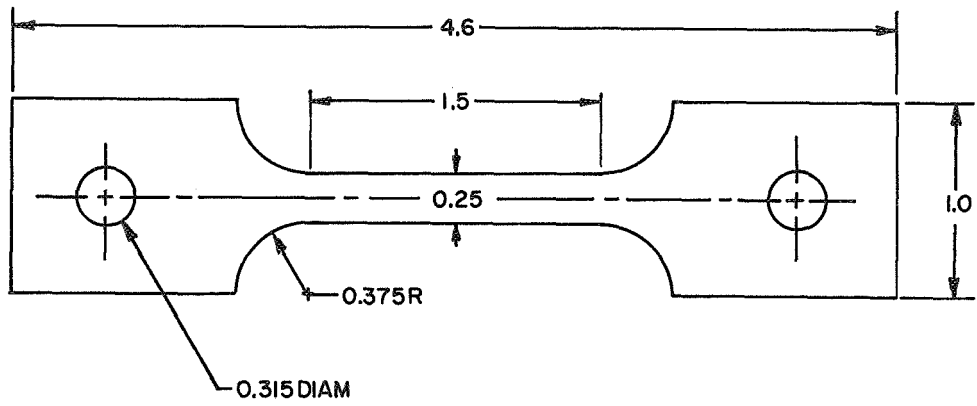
TENSILE-SPECIMEN CONFIGURATION
